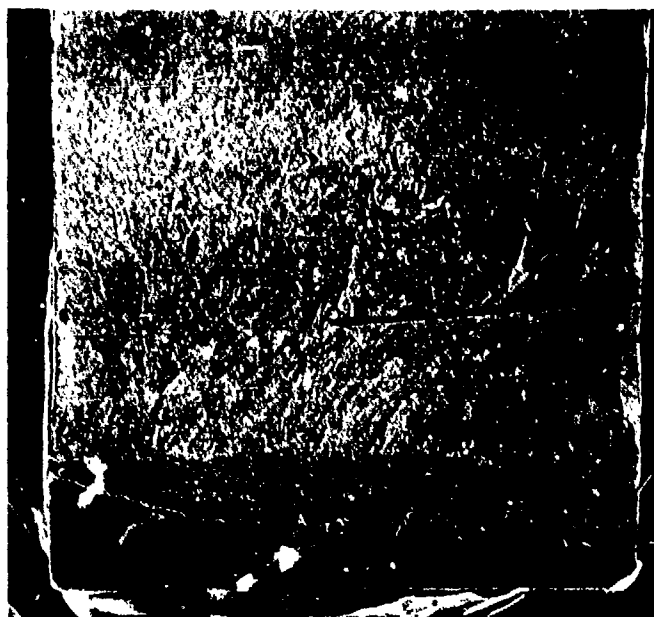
Fracture surface of an A-514 weld Charpy specimen tested at -196°C , 8x.
